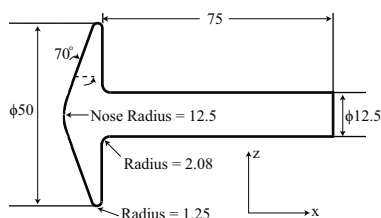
Planetary probe configuration. Dimensions are in millimetres.
